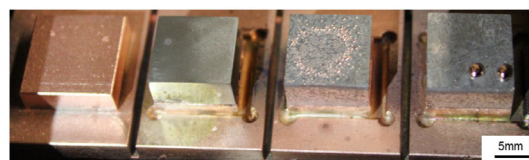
Sideview: JUDITH 2 mock-up after exposure with all three types of samples/joints - from left to right: pure tungsten, flat joint, rough joint.
